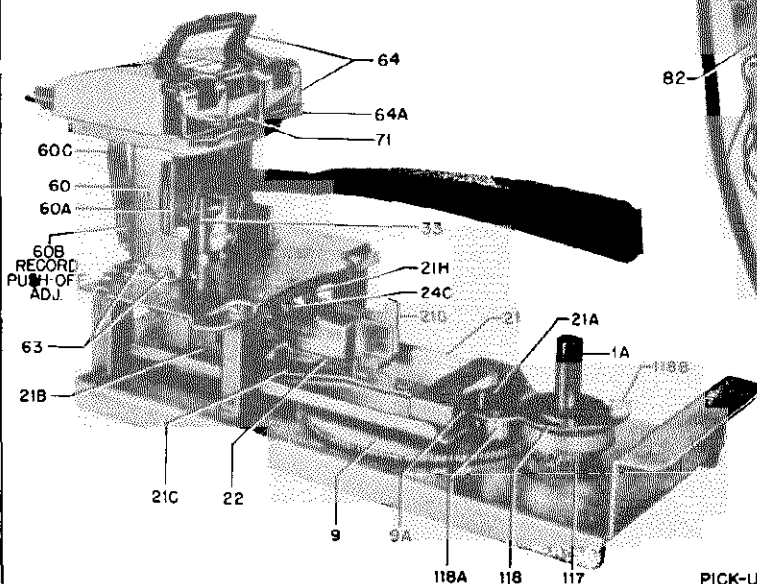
VIEW OF RECORD CHANGER WITH BASE & MOTOR ASSEMBLY REMOVED
